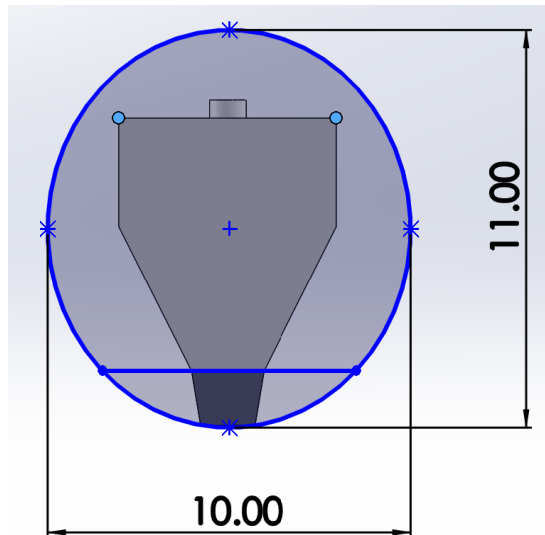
Dragonforce Fuselage Dimensions with Cargo Floor and Payload Tank (Units in ft)
